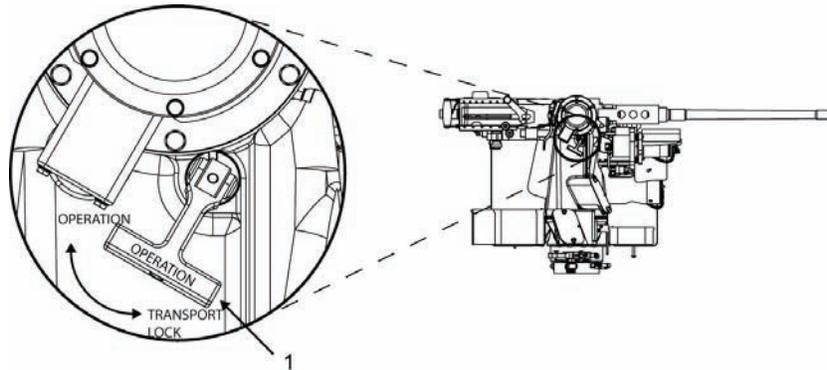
Elevation Transport Lock, Maximum Elevation.
